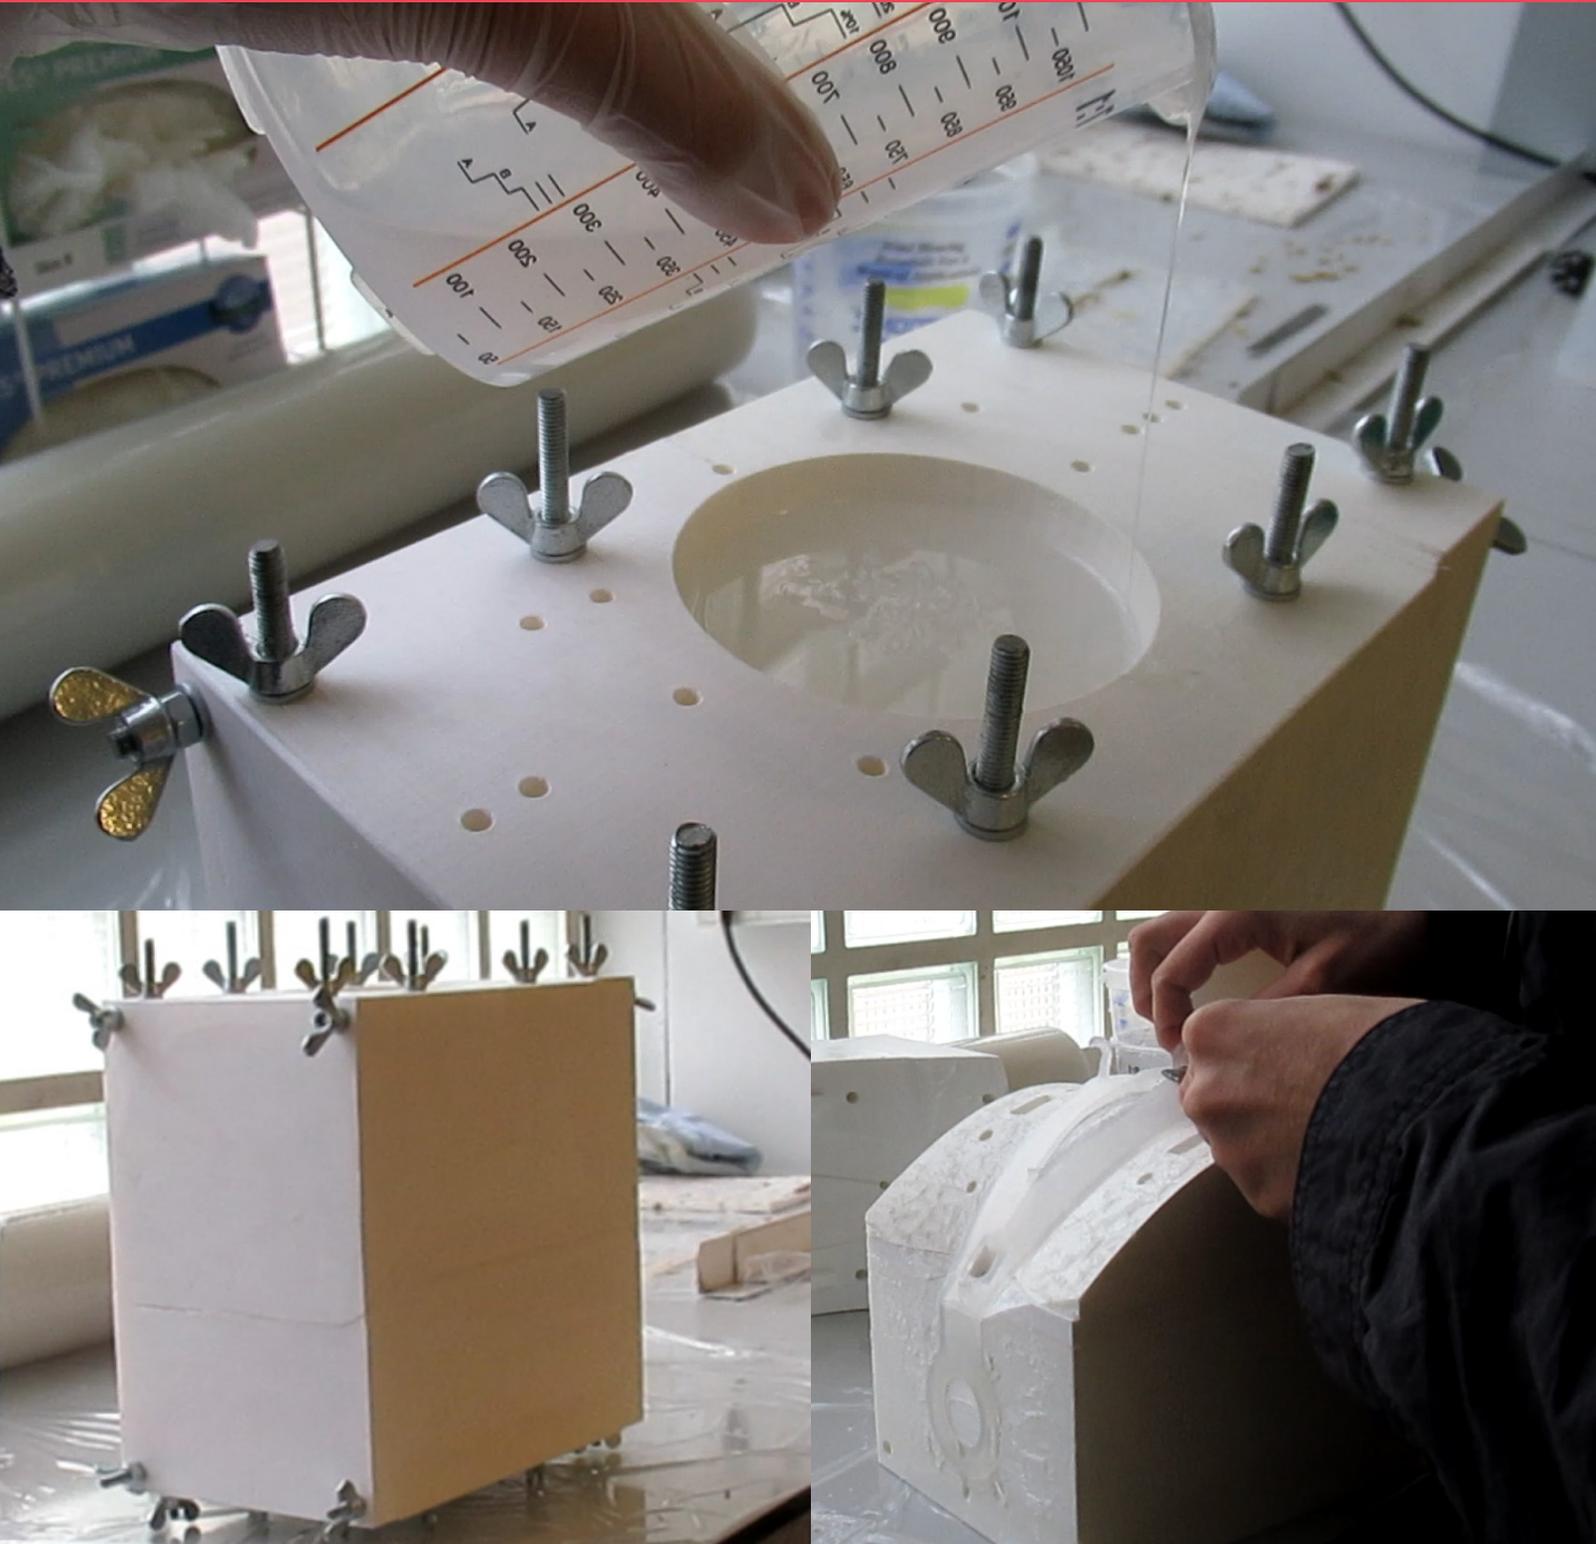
The Final Mold (TOP: Pouring the mixed and vacuumed silicon into the mold, BOTTOM LEFT: The silicon is curing inside the mold, BOTTOM RIGHT: The product is being taken out of the mold).
